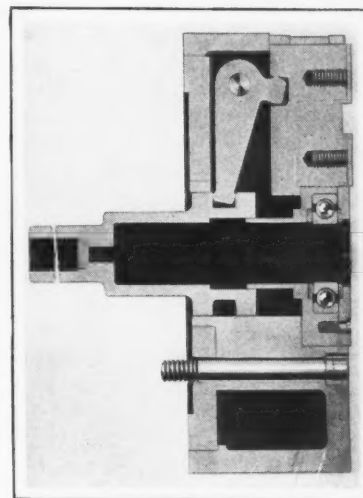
Air-operated Lathe Chuck Equipped with Ball Bearing to Pilot Boring-bars
